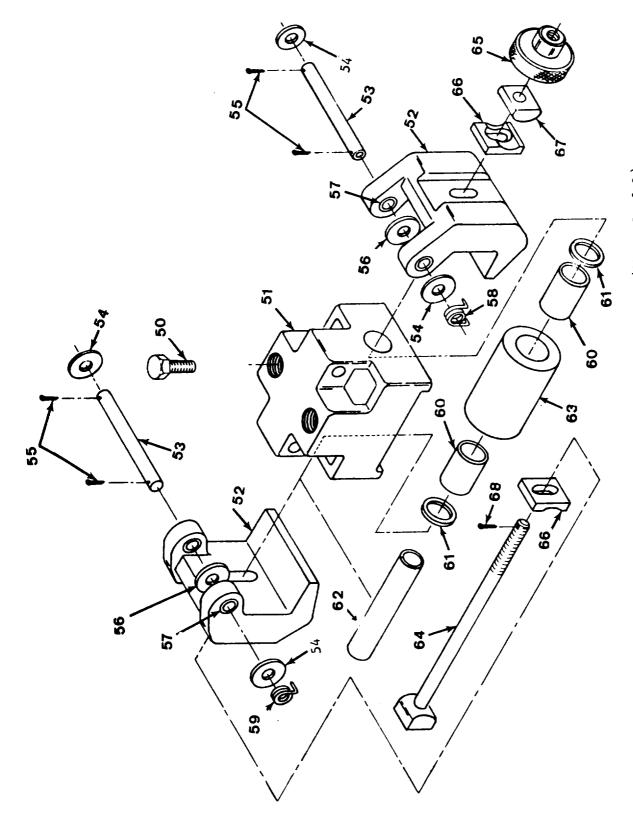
Oxygen Servicing Unit, Exploded View (Sheet 2 of 2)
